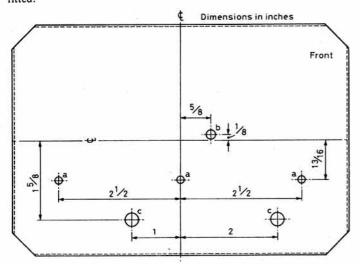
Right-hand screen (with flanges away from viewer). (a) 4BA clearance hole for bolting to chassis. (b) 0 • 203in dia hole for mounting T3. (c) 0 • 25in dia hole for grommet
